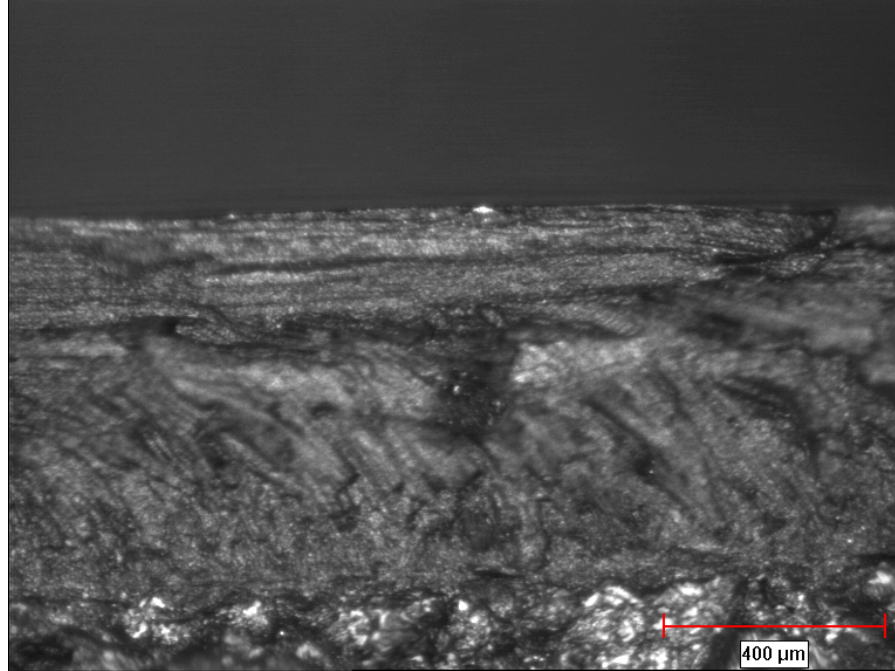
Beach marks in weld fusion zone near surface of 0.2% mechanical strain
